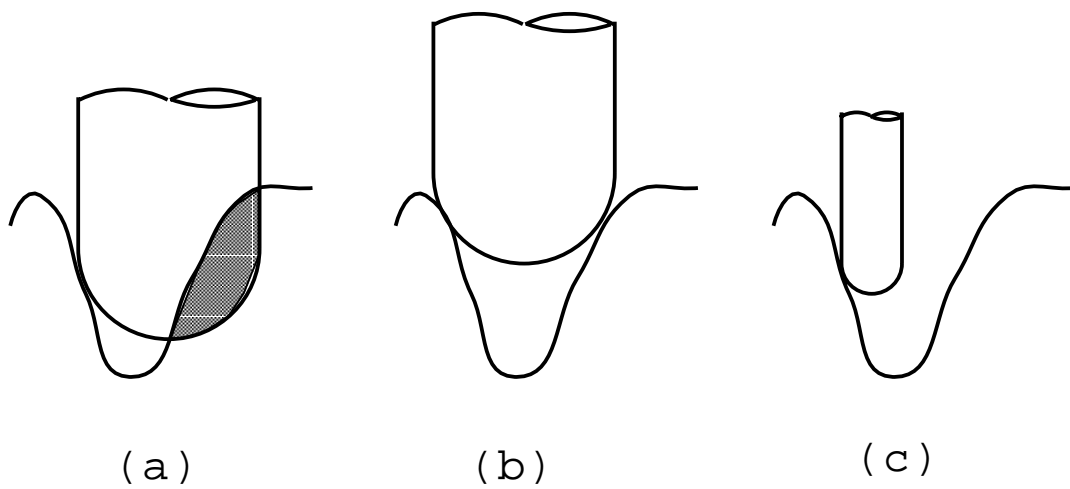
Gouging on sculptured surface (a) Gouging; (b) Undercut; (c) Removing the undercut part, using smaller size ball end-mill
